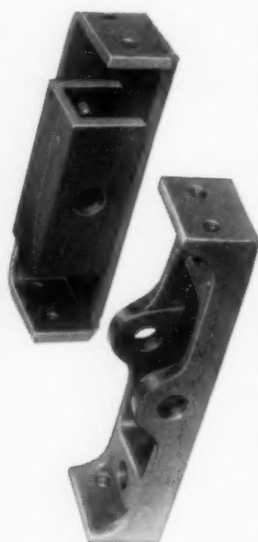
Welded steel saves 30% cost ... cuts weight 50%. Design is simpler ... plain channel replaces complicated castings.
